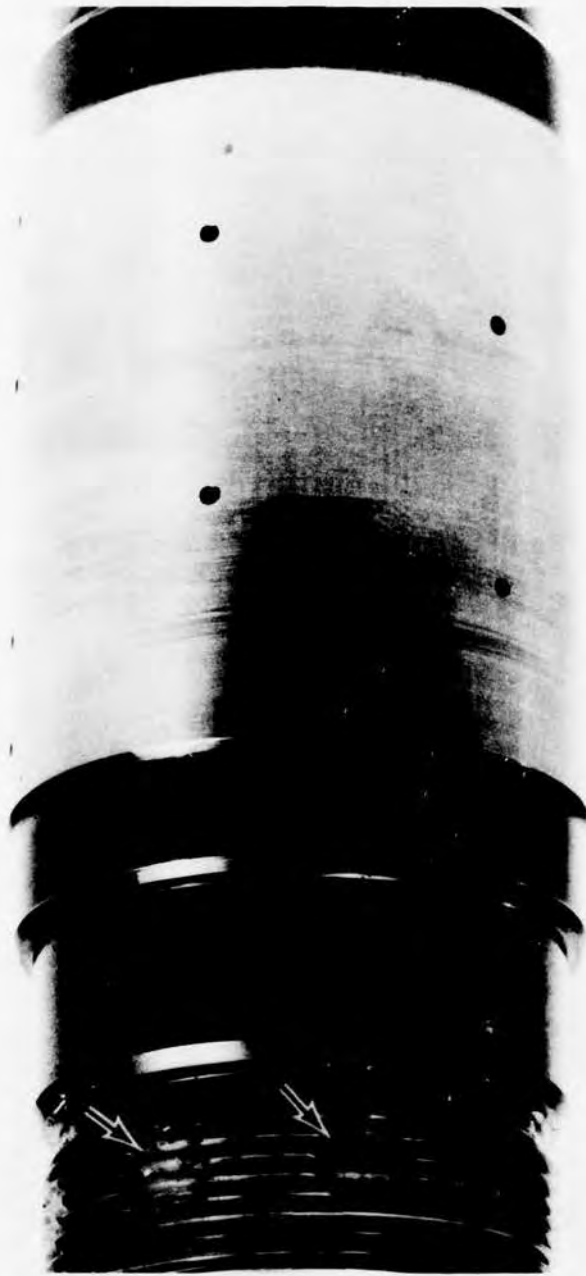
Reworked Sprag Clutch Inner Shaft With Plugged Holes.
